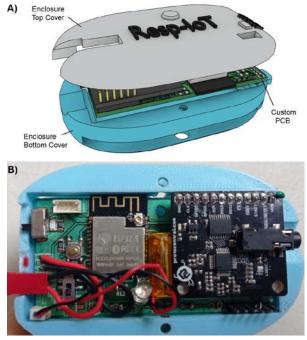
Enclosure to Protect the Circuit. (A) 3D Design Rendering of the Enclosure. (B) PCB Placed Inside the 3D Printed Enclosure.
